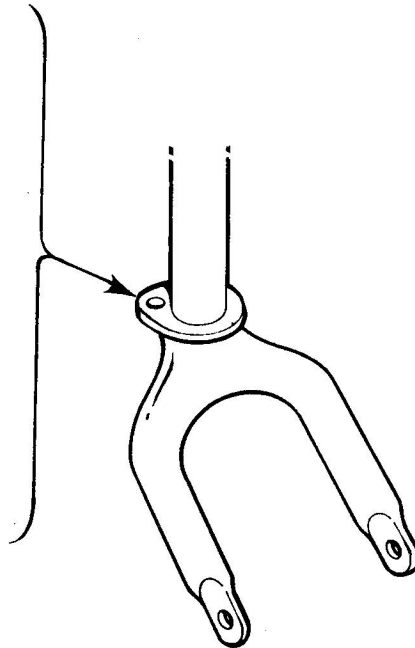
Tail Wheel Locking Pin Hole Repair
